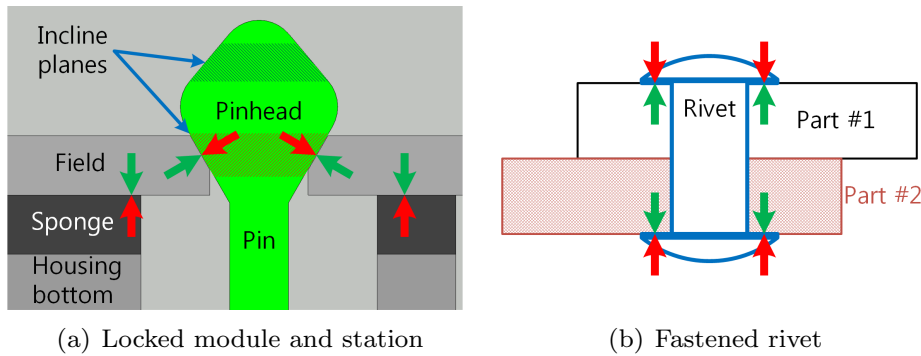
Cross-sectional view of locked module and fastened rivet
